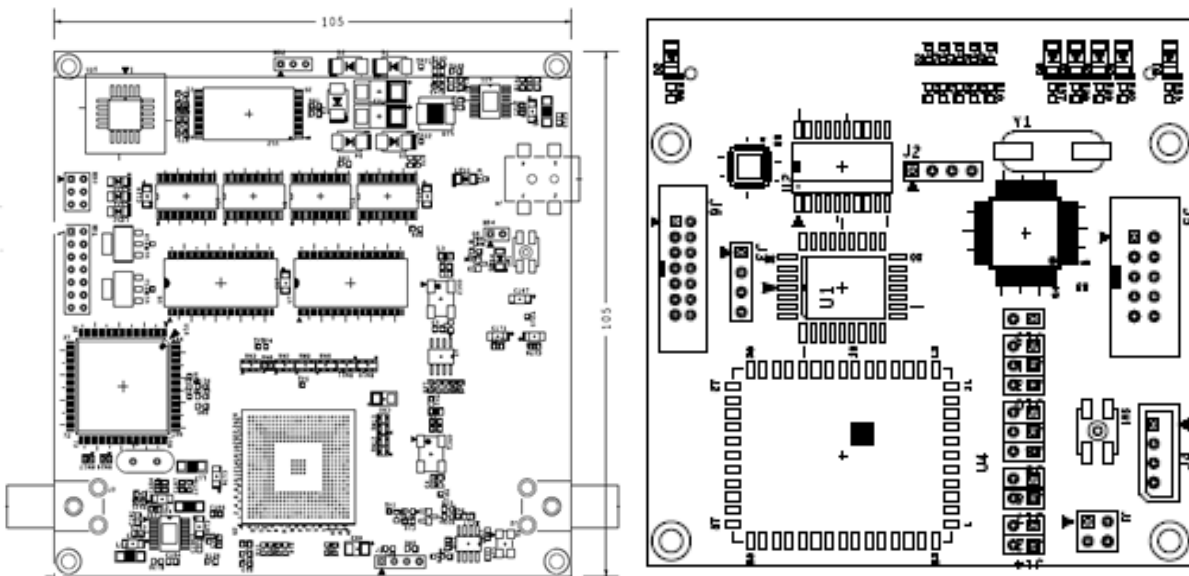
PCB layout of H.263 decoder board and RX WIFI module
